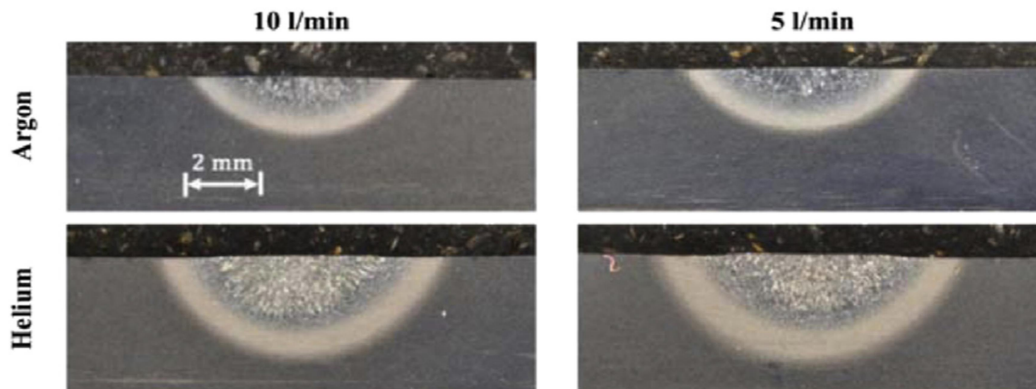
Weld macrographs showing effect of shielding gas configuration on TIG welding [12].
